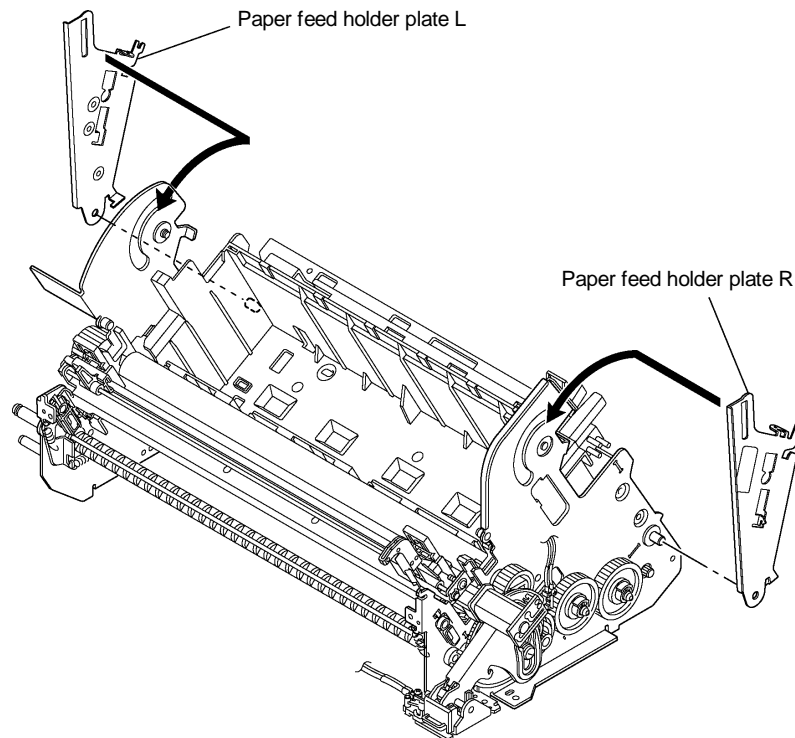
Installing the Paper Feed Holder Assy
